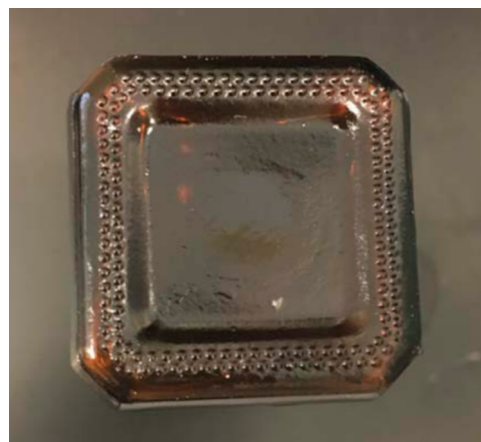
Bottom of the 3 × 3 cm bottle used as pattern for molds.
